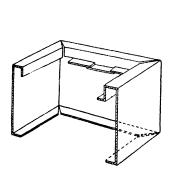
Sectional Perspective of Body Showing Bend Construction
